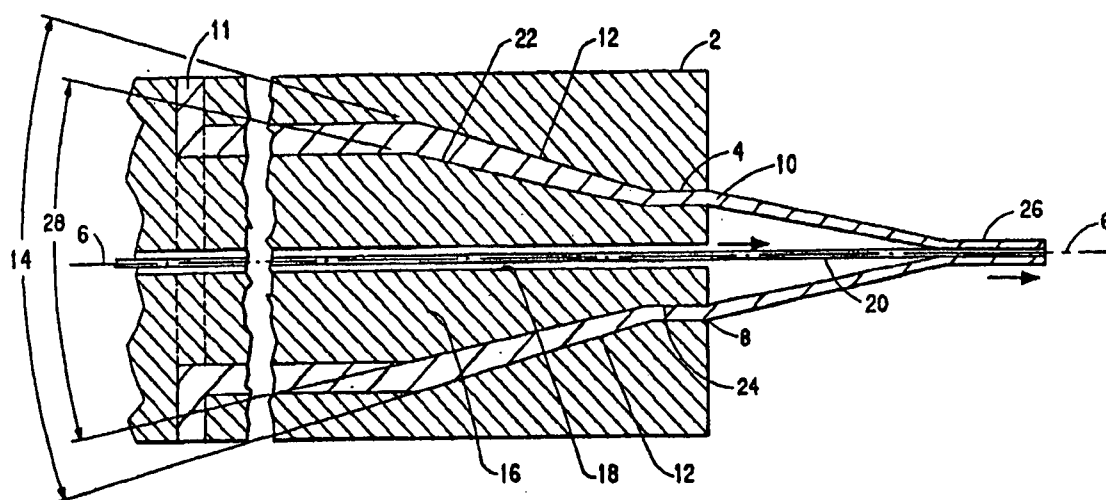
Crosshead die for wire coating (from Buckmaster *et al.*, 1997)
